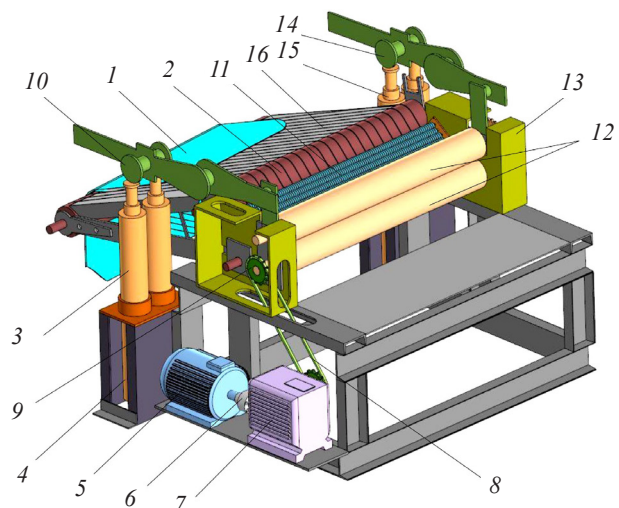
3-D view of the proposed roller processing machine for leather machining: 1 – leather; 2 – conveyor rollers; 3, 15 – pressing mechanisms of the working shafts; 4 – rack; 5 – engine; 6 – clutch; 7 – reducer; 8 – chain drive; 9 – sprocket; 10, 14 – bracket; 11 – guiding device; 12 – working rolls; 13 – bed; 16 – strings
